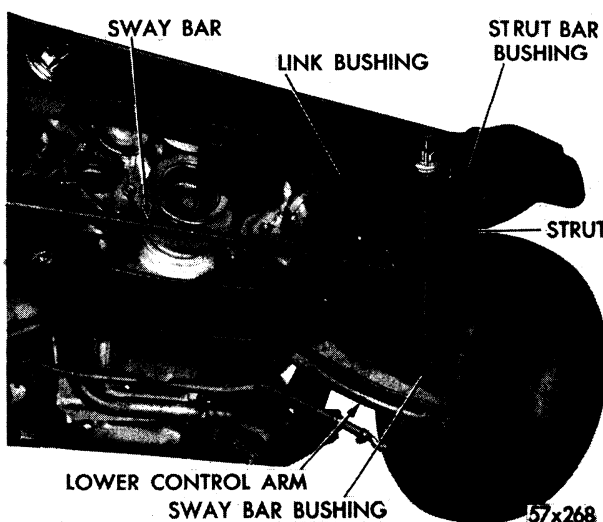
Lower Control Arm, Strut and Sway Bar Assembly
